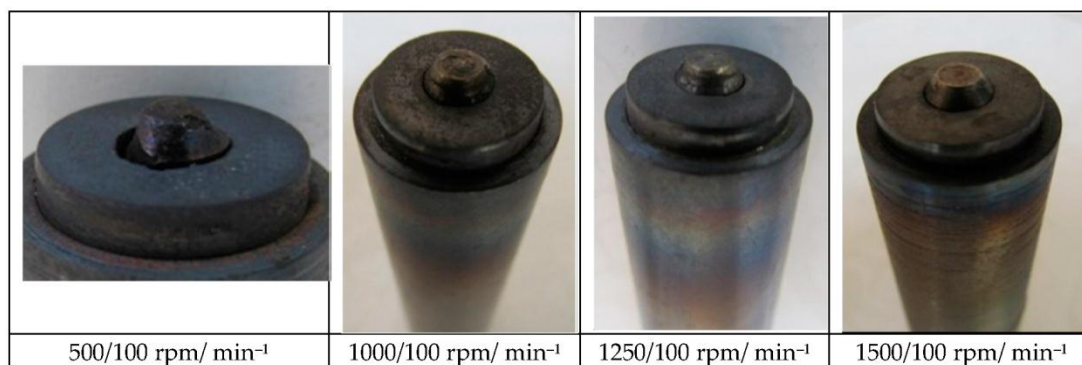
Photographs of tungsten-based alloy tool after welding at different process conditions.
